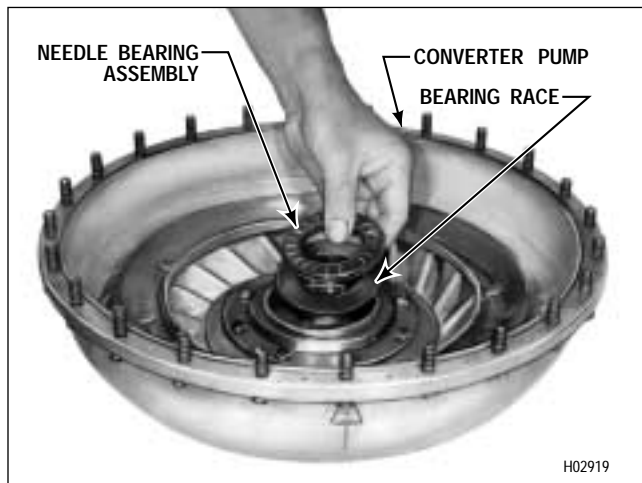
Removing (or Installing) Torque Converter Pump Bearing and Race (AT 543)
